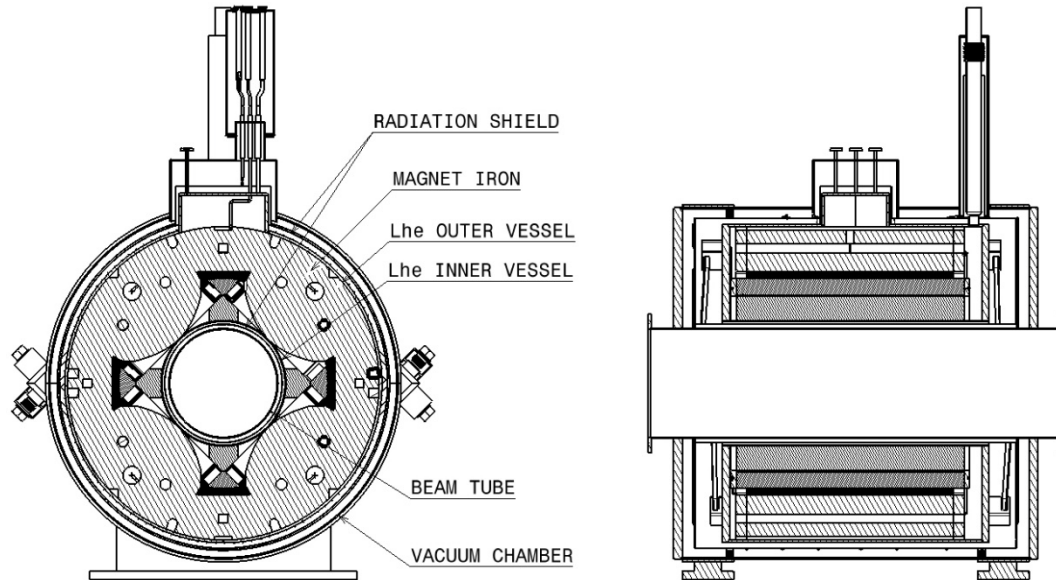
Cross sectional view of the FAIR Super FRS quadrupole cryostat
